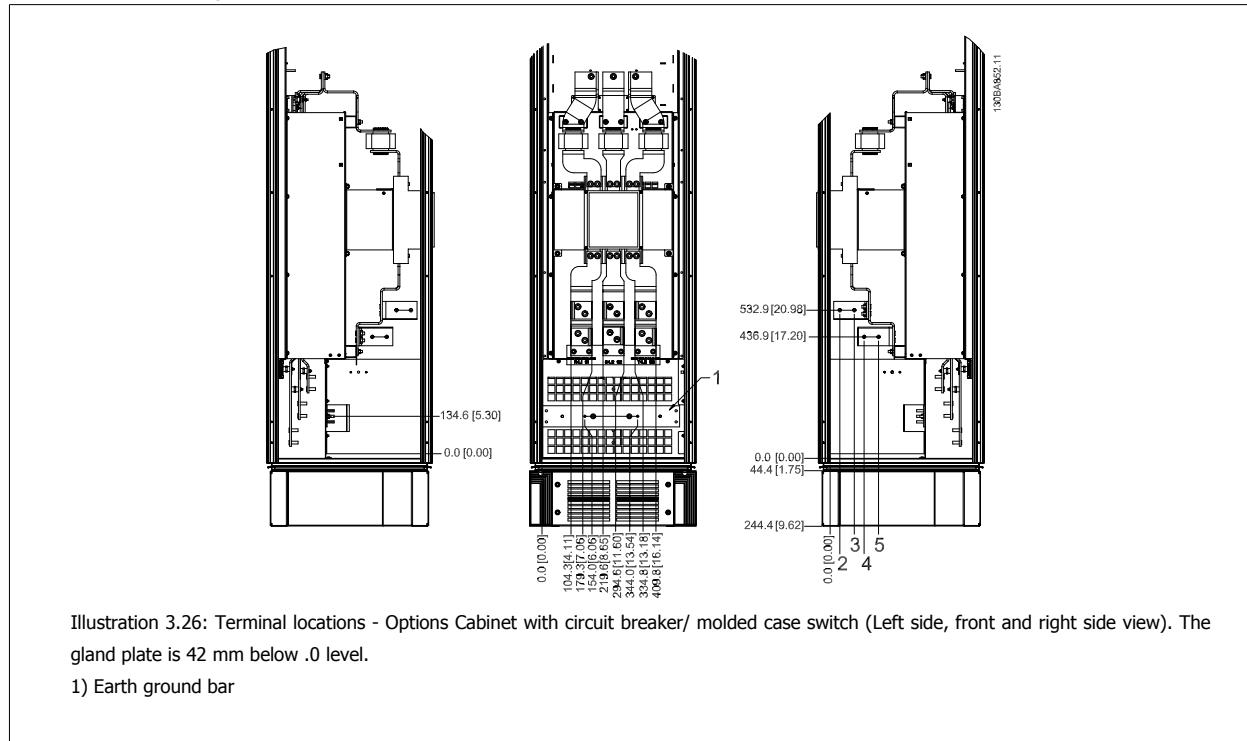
Terminal locations - Options Cabinet with circuit breaker/ molded case switch (Left side, front and right side view). The gland plate is 42 mm below .0 level.
